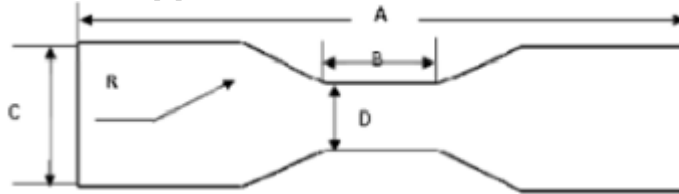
Tensile Test Sample Size (mm) A = 115 mm, B = 38 mm, C = 20 mm, D = 7 mm
